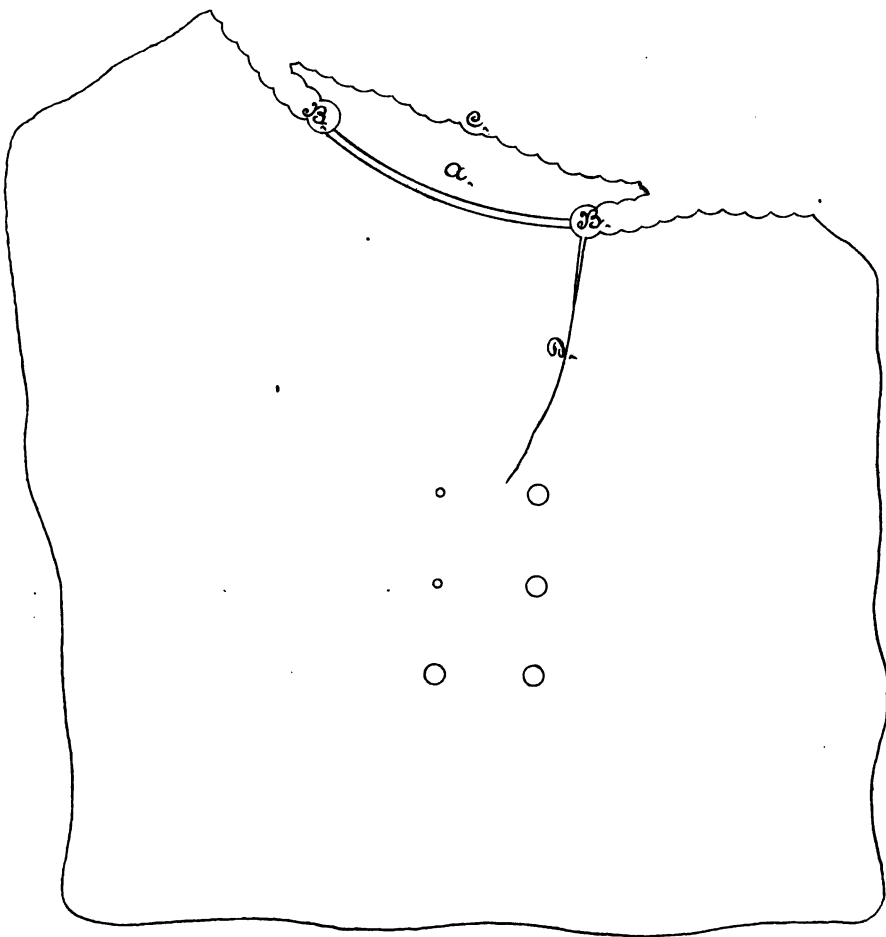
Illustrating failure of tube sheet of "Atlanta's" boilers.
